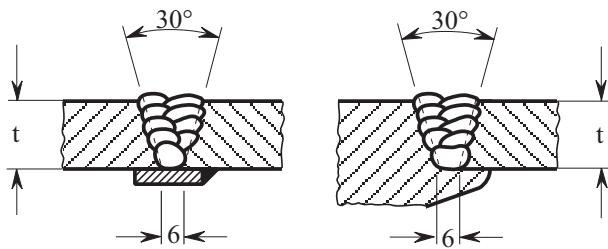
Single-side welds with permanent weld pool supports (backings)
